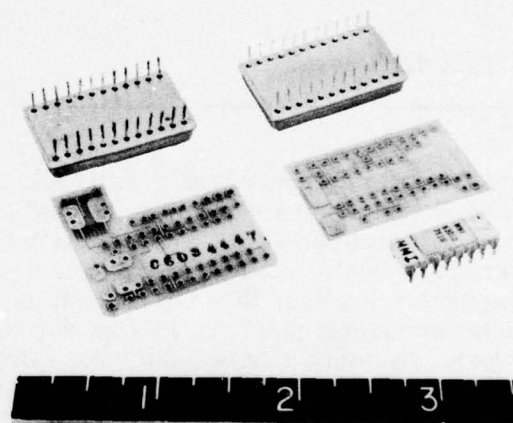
Hybrid Packages and PC Boards, Bottom View.
